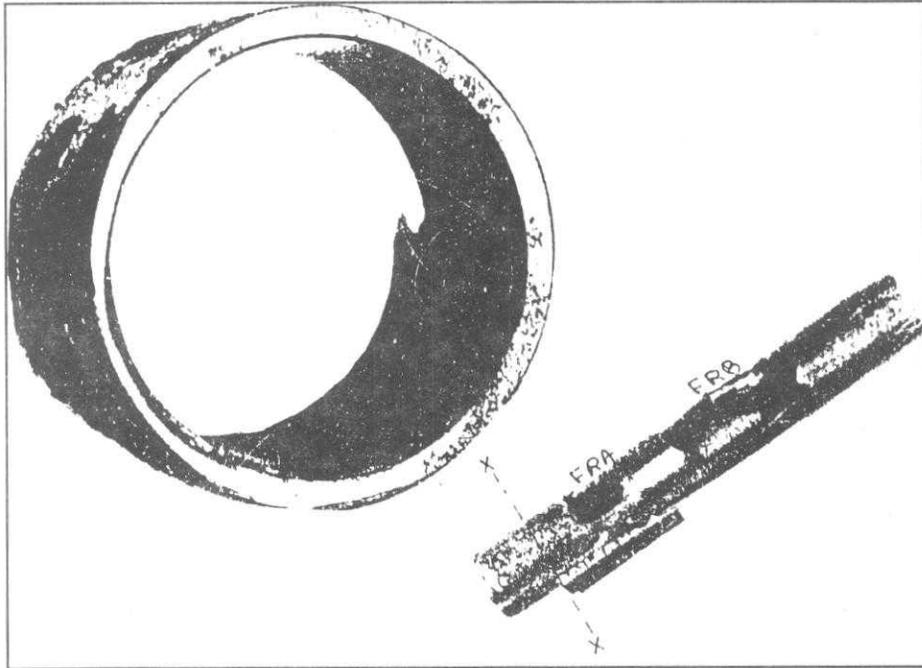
shows another failure of a reheater tube. Here the failure had taken place from the welded cleats. Figure 4a schematically shows the cleats and pin arrangements and Figure 4b the failed pin/cleat. FRA and FRB as marked on Figure 3 are position where the cleats were welded. Figure 3 also shows the cross section of the failed tube. It may be seen that the tube had suffered external wastage of metal from one side (see the right hand side of the cross section).
